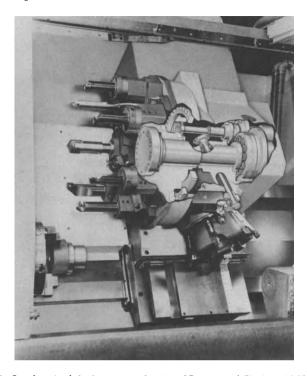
Synchronised dual turret mechanism. [Courtesy of Cincinnati Milacron.]
